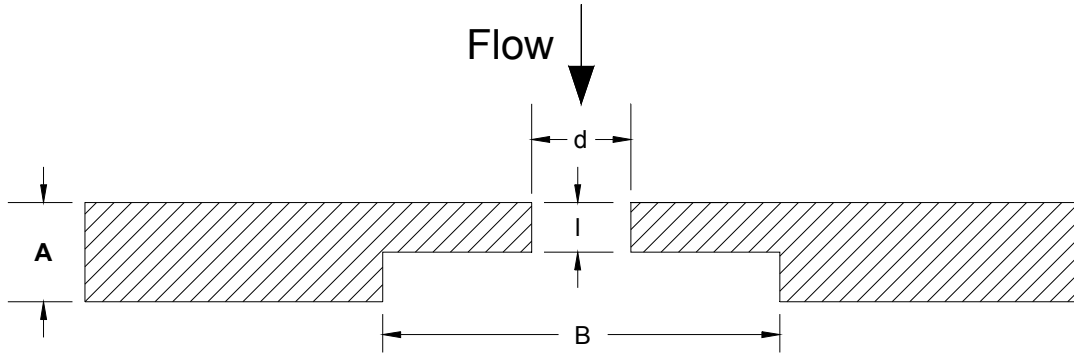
Test Section Dimensional Drawing (Mincks 2002)
